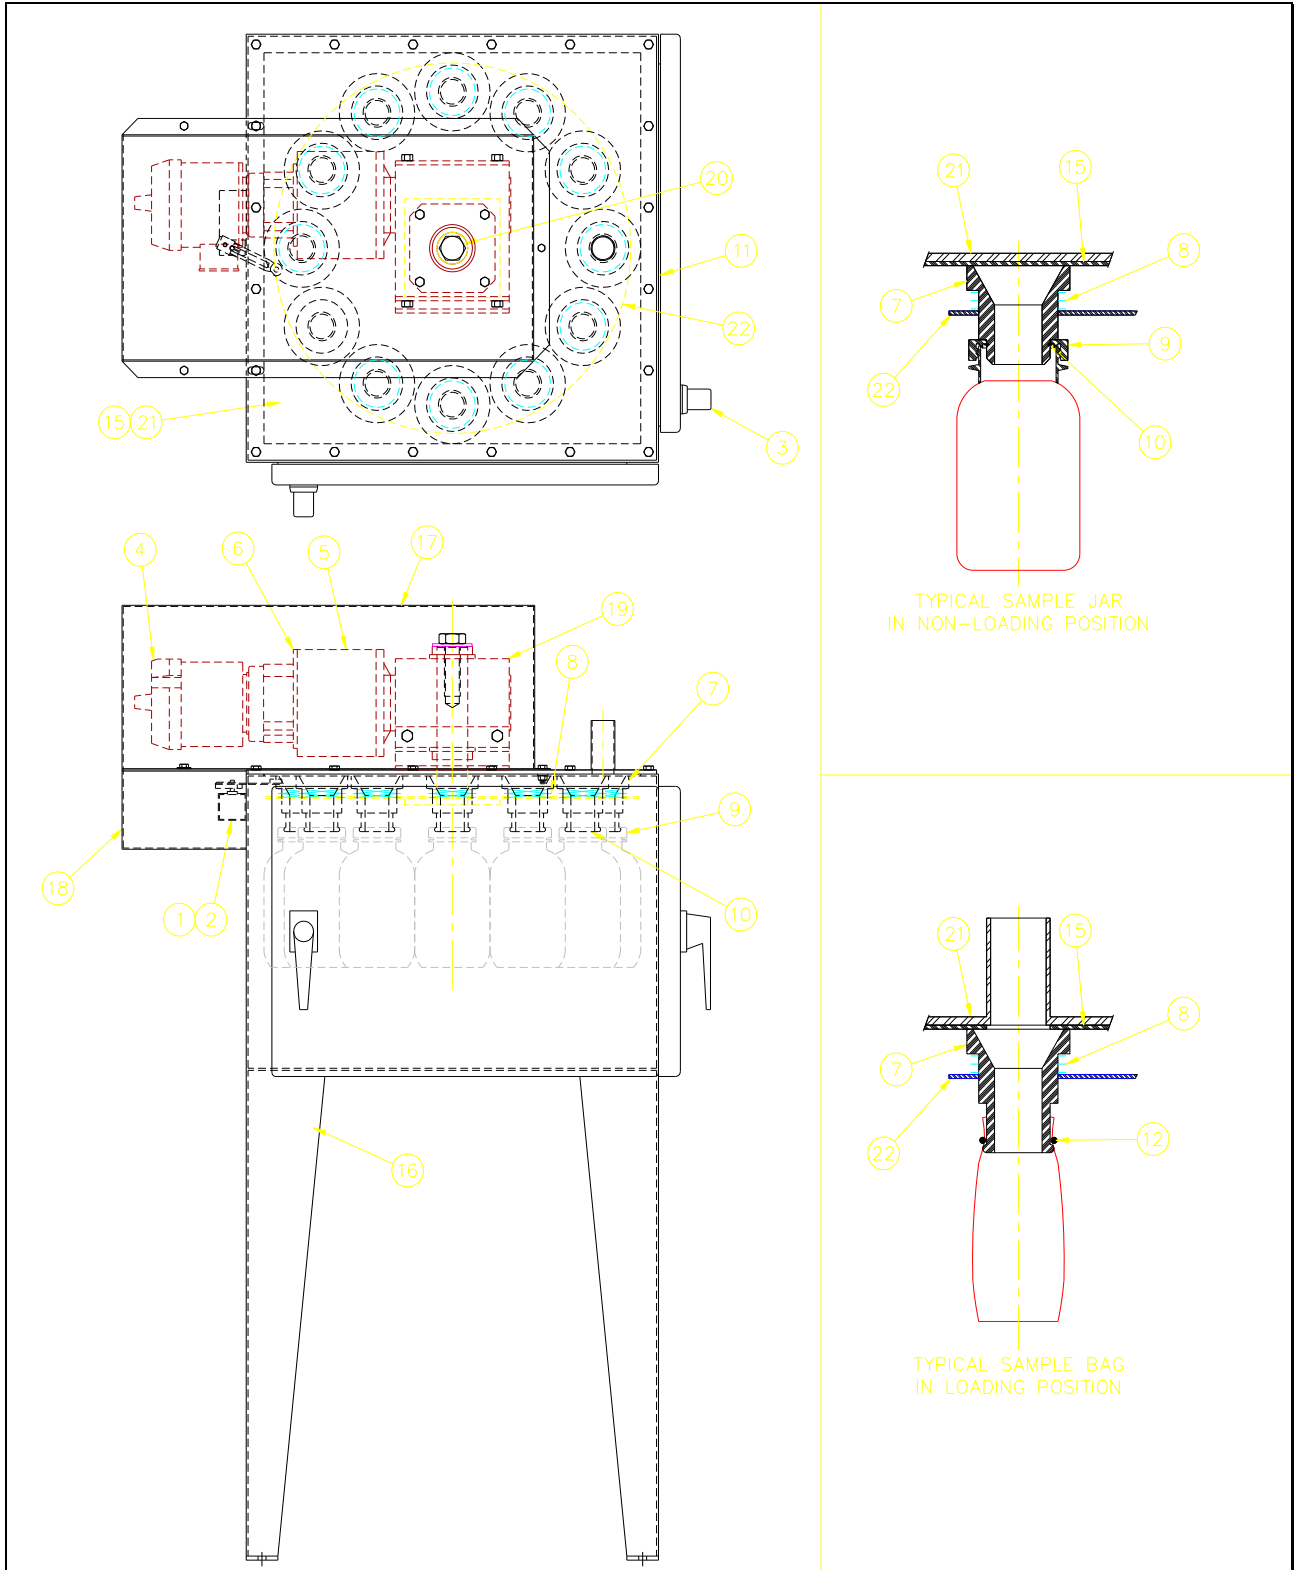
, SCS PLAN & ELEVATION VIEWS
